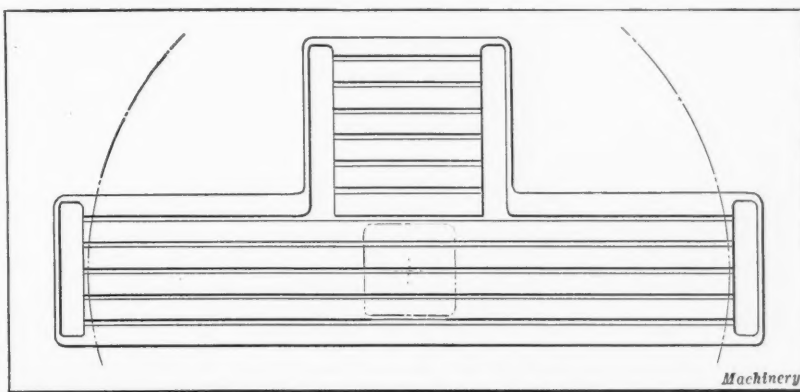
Conveniently arranged Three-arm Base for a Radial Drilling Machine
